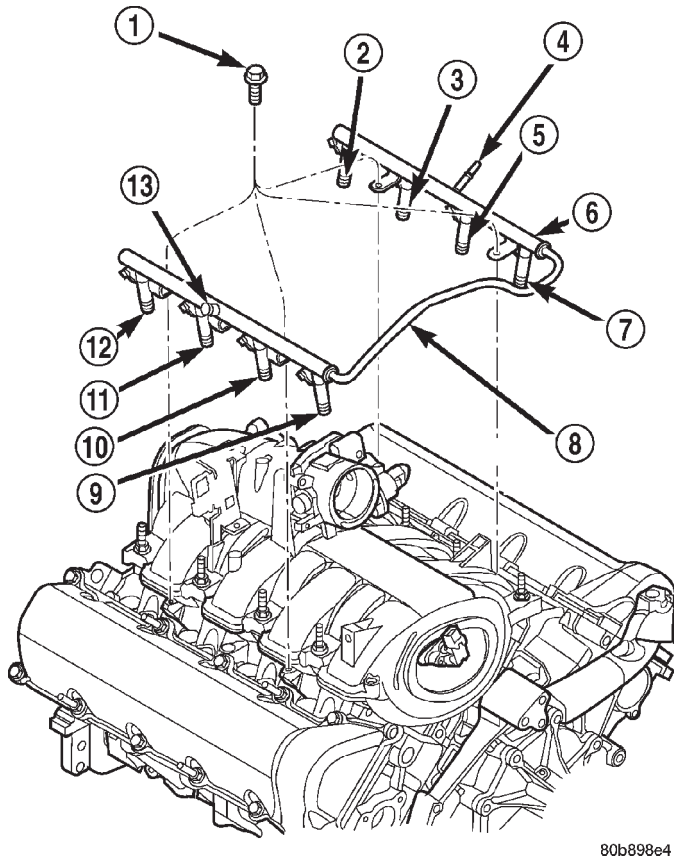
Test Port Cap Location—4.7L V-8 Engine
